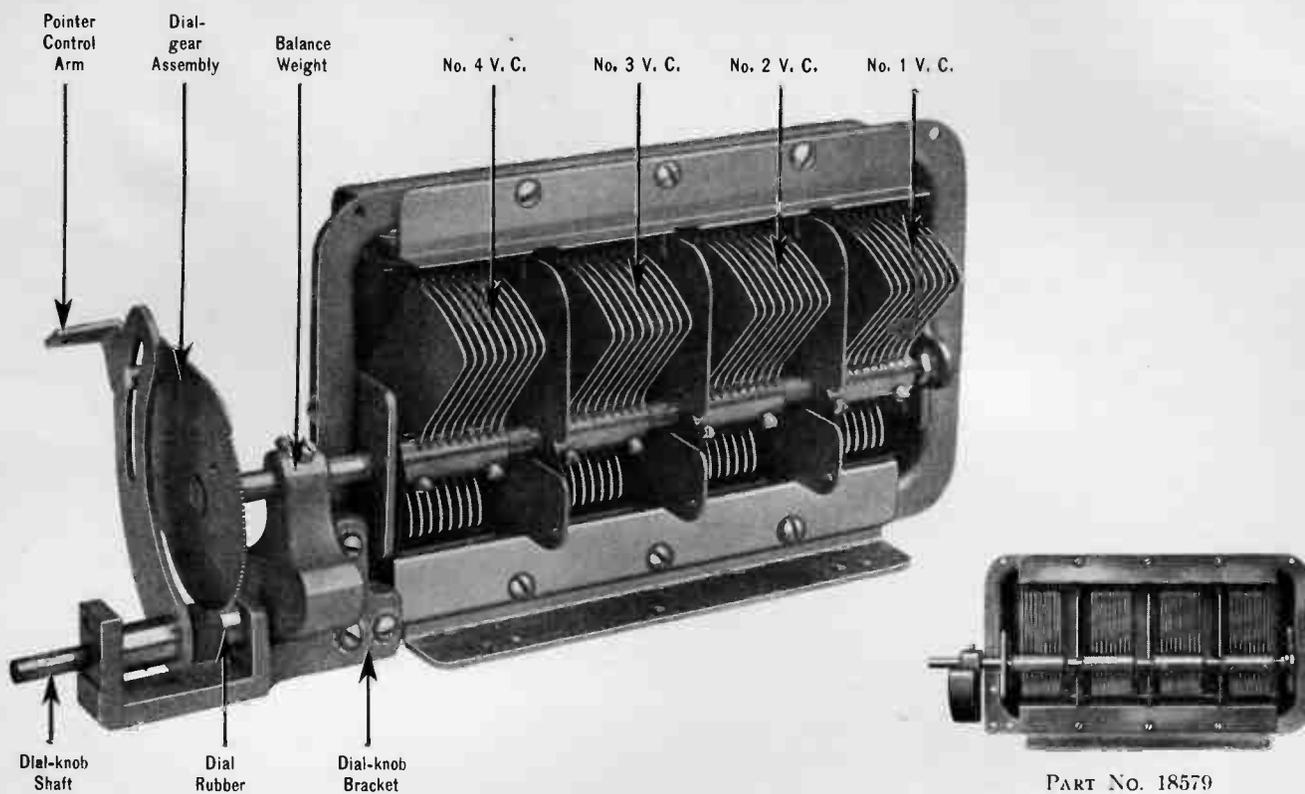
VARIABLE-CONDENSER ASSEMBLY.
